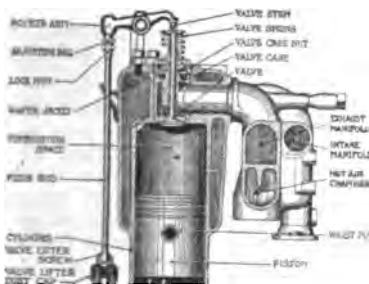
Buick's exhaust heating of mixture. Note the exhaust manifold which adjoins the inlet manifold (IM). The lower part of exhaust manifold (hot air chamber) is divided from the exhaust (above). Air passes through lower chamber which is heated. Hot air is also drawn into jacket around upper part of carburetor by flexible tube connection (FT). Also see page 179, Marvel carburetor which is used on the Buick.
